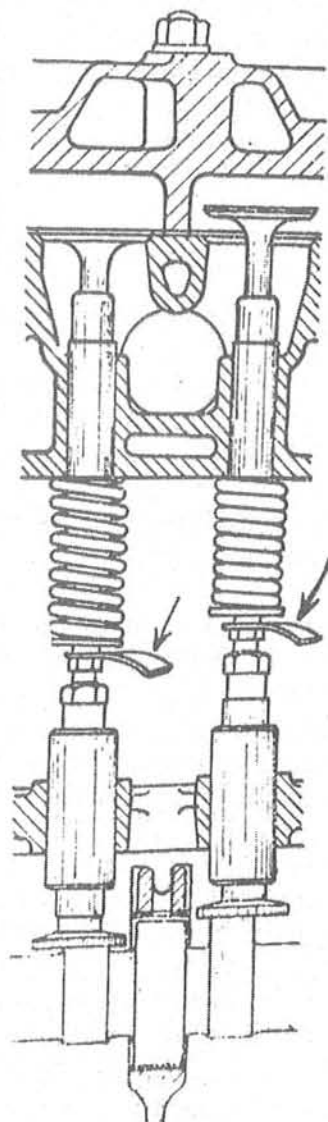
Method of loading cams adjacent to suspected camshaft bearings using feeler stock to take up clearance.
